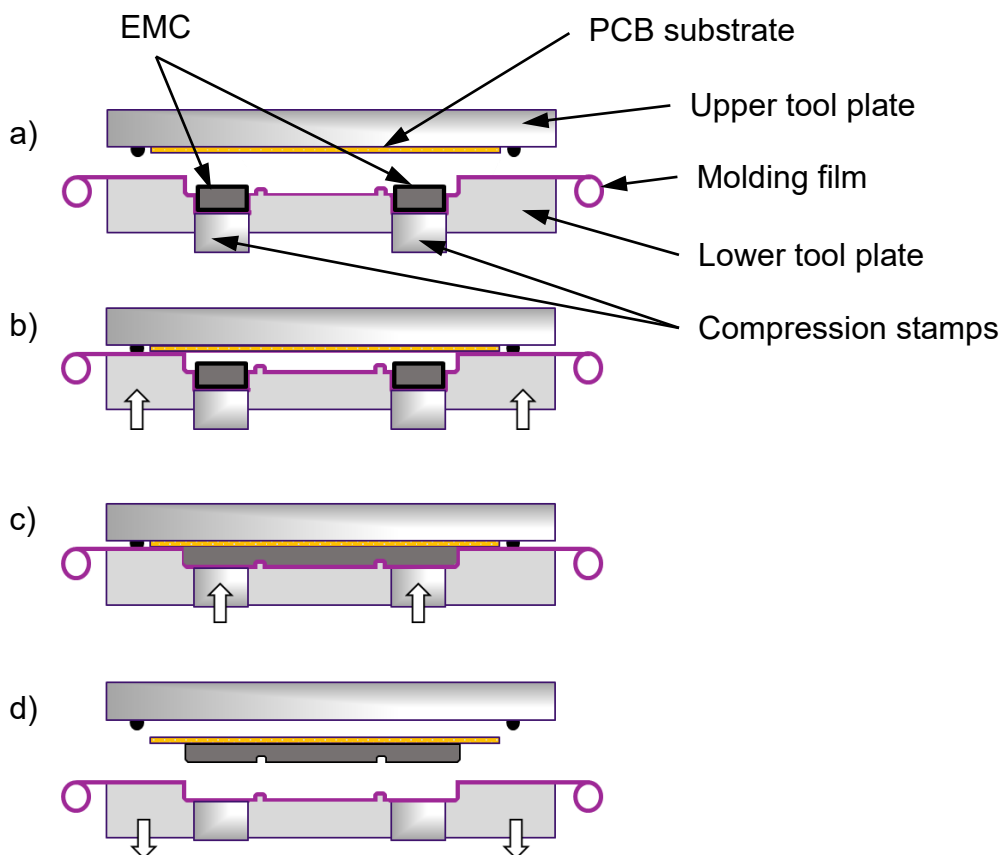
Schematic process steps in local pressure molding a) placing the EMC sheets and PCB substrate b) heating plates close c) compression stamps transfer and compress molten EMC d) solidified part is ejected
